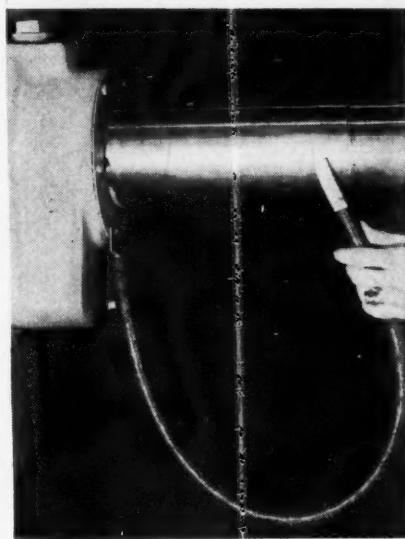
Bearing currents can be detected by holding a cable with one end fastened to the bearing housing against the shaft. Sparks at contact point indicate the possibility of bearing currents.
